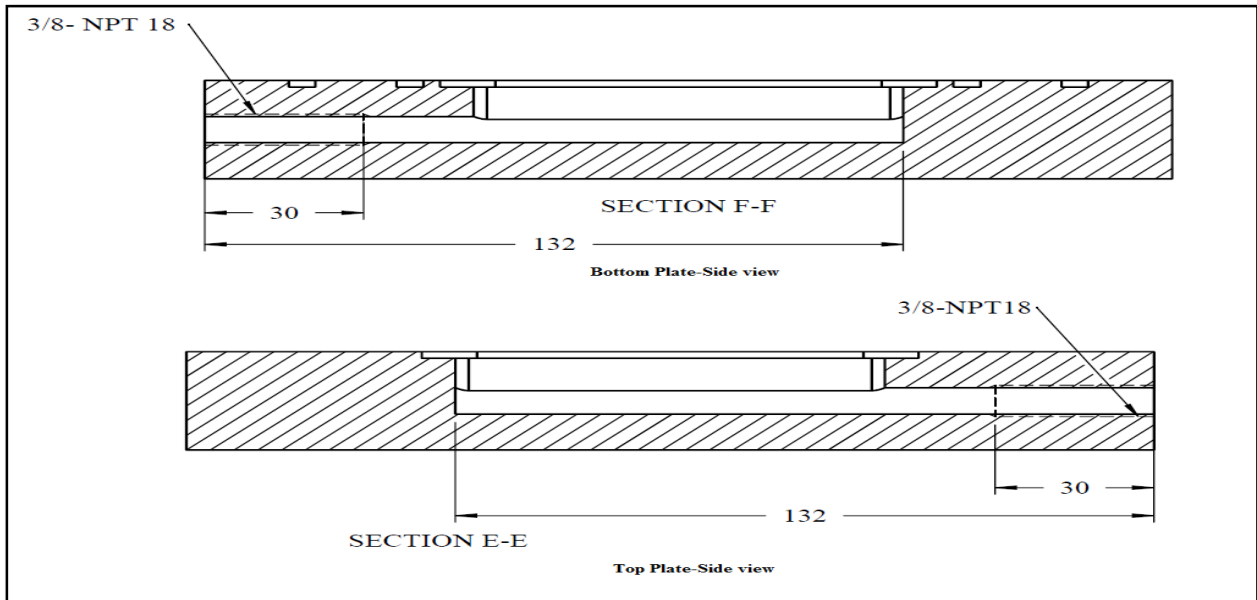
cross section of feed and permeate inlet and outlet looking from side view
